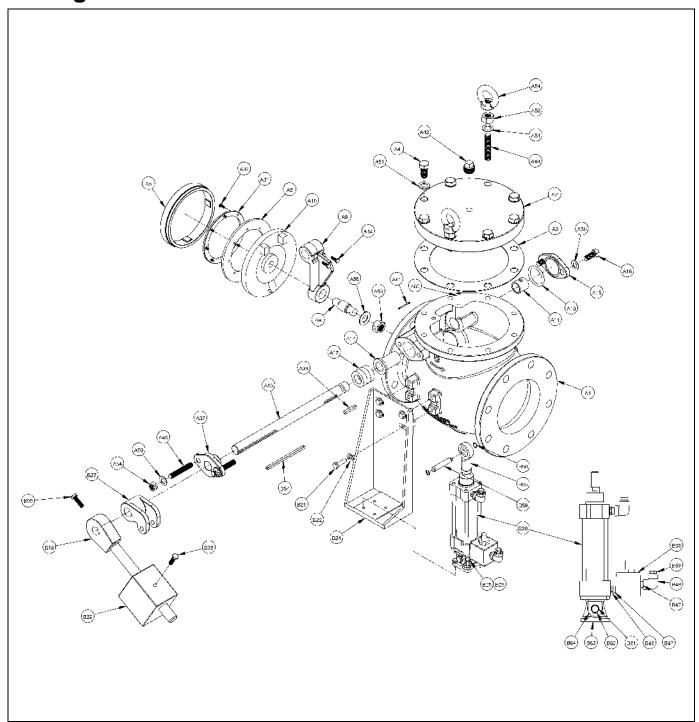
APCO CVS-250/250A Swing Check Valve (with Air Cushion)
